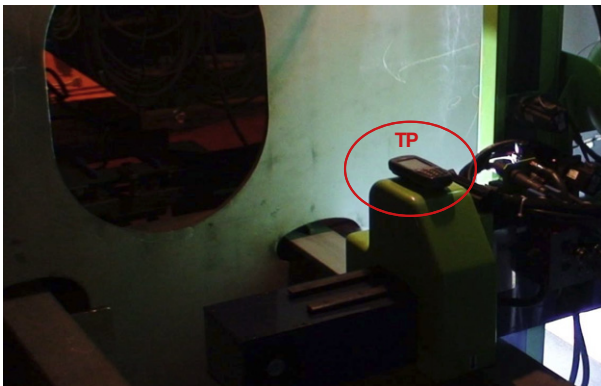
Welding experiment with the developed TP in a double hull ship structure.
